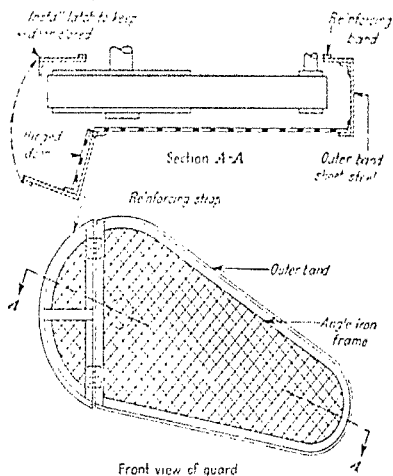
Punch-press flywheel guard, individual drive.¹
